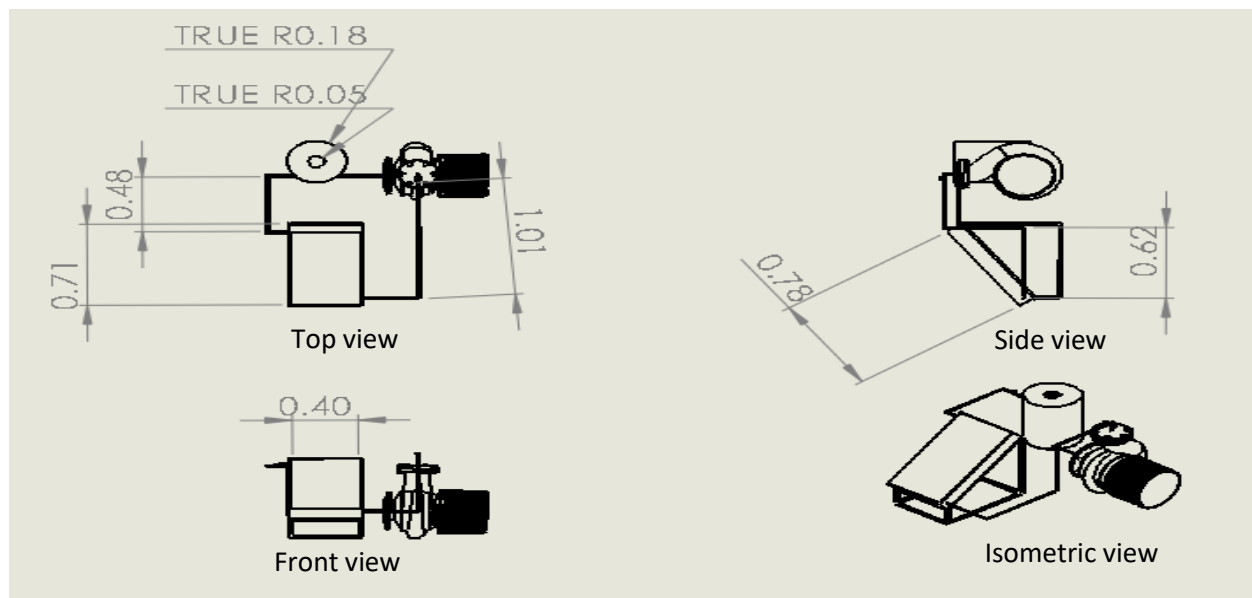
Solar flat plate collector system drawing views (all dimension is in {m})
